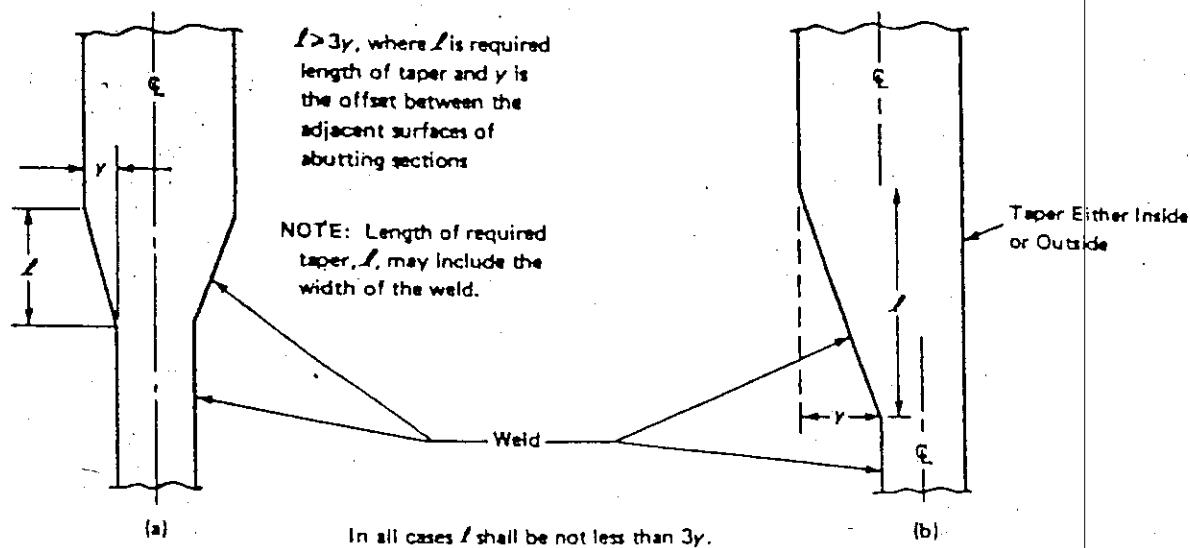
BUTT WELDING OF PLATES OF UNEQUAL THICKNESS
